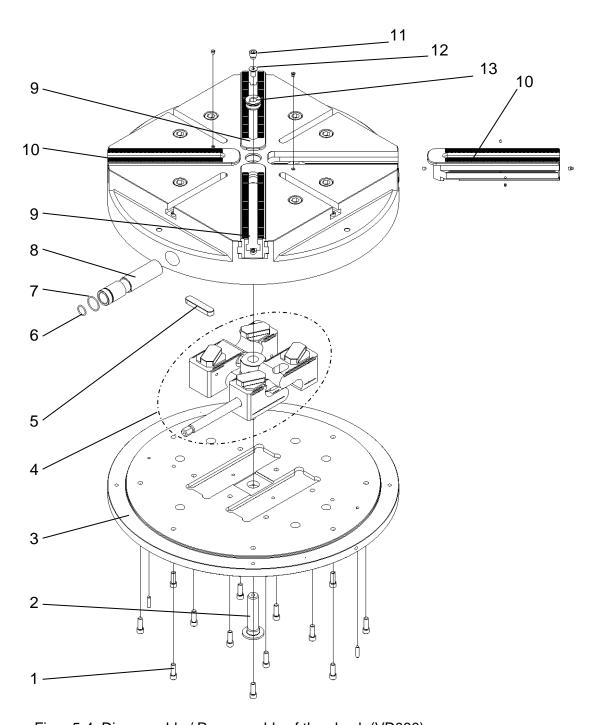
Disassembly / Re-assembly of the chuck (VD080)
